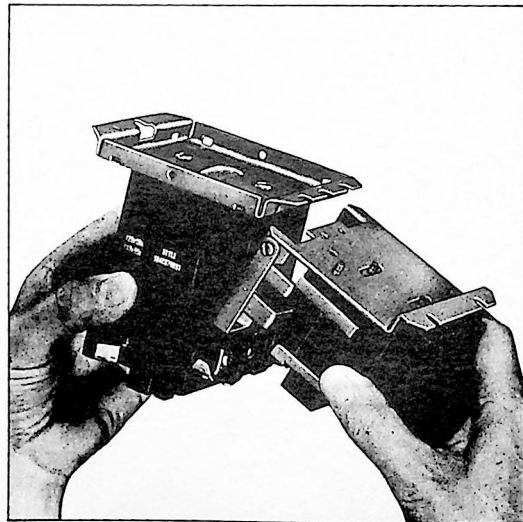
Assembly and Installation of Latched A/200 Contactors
